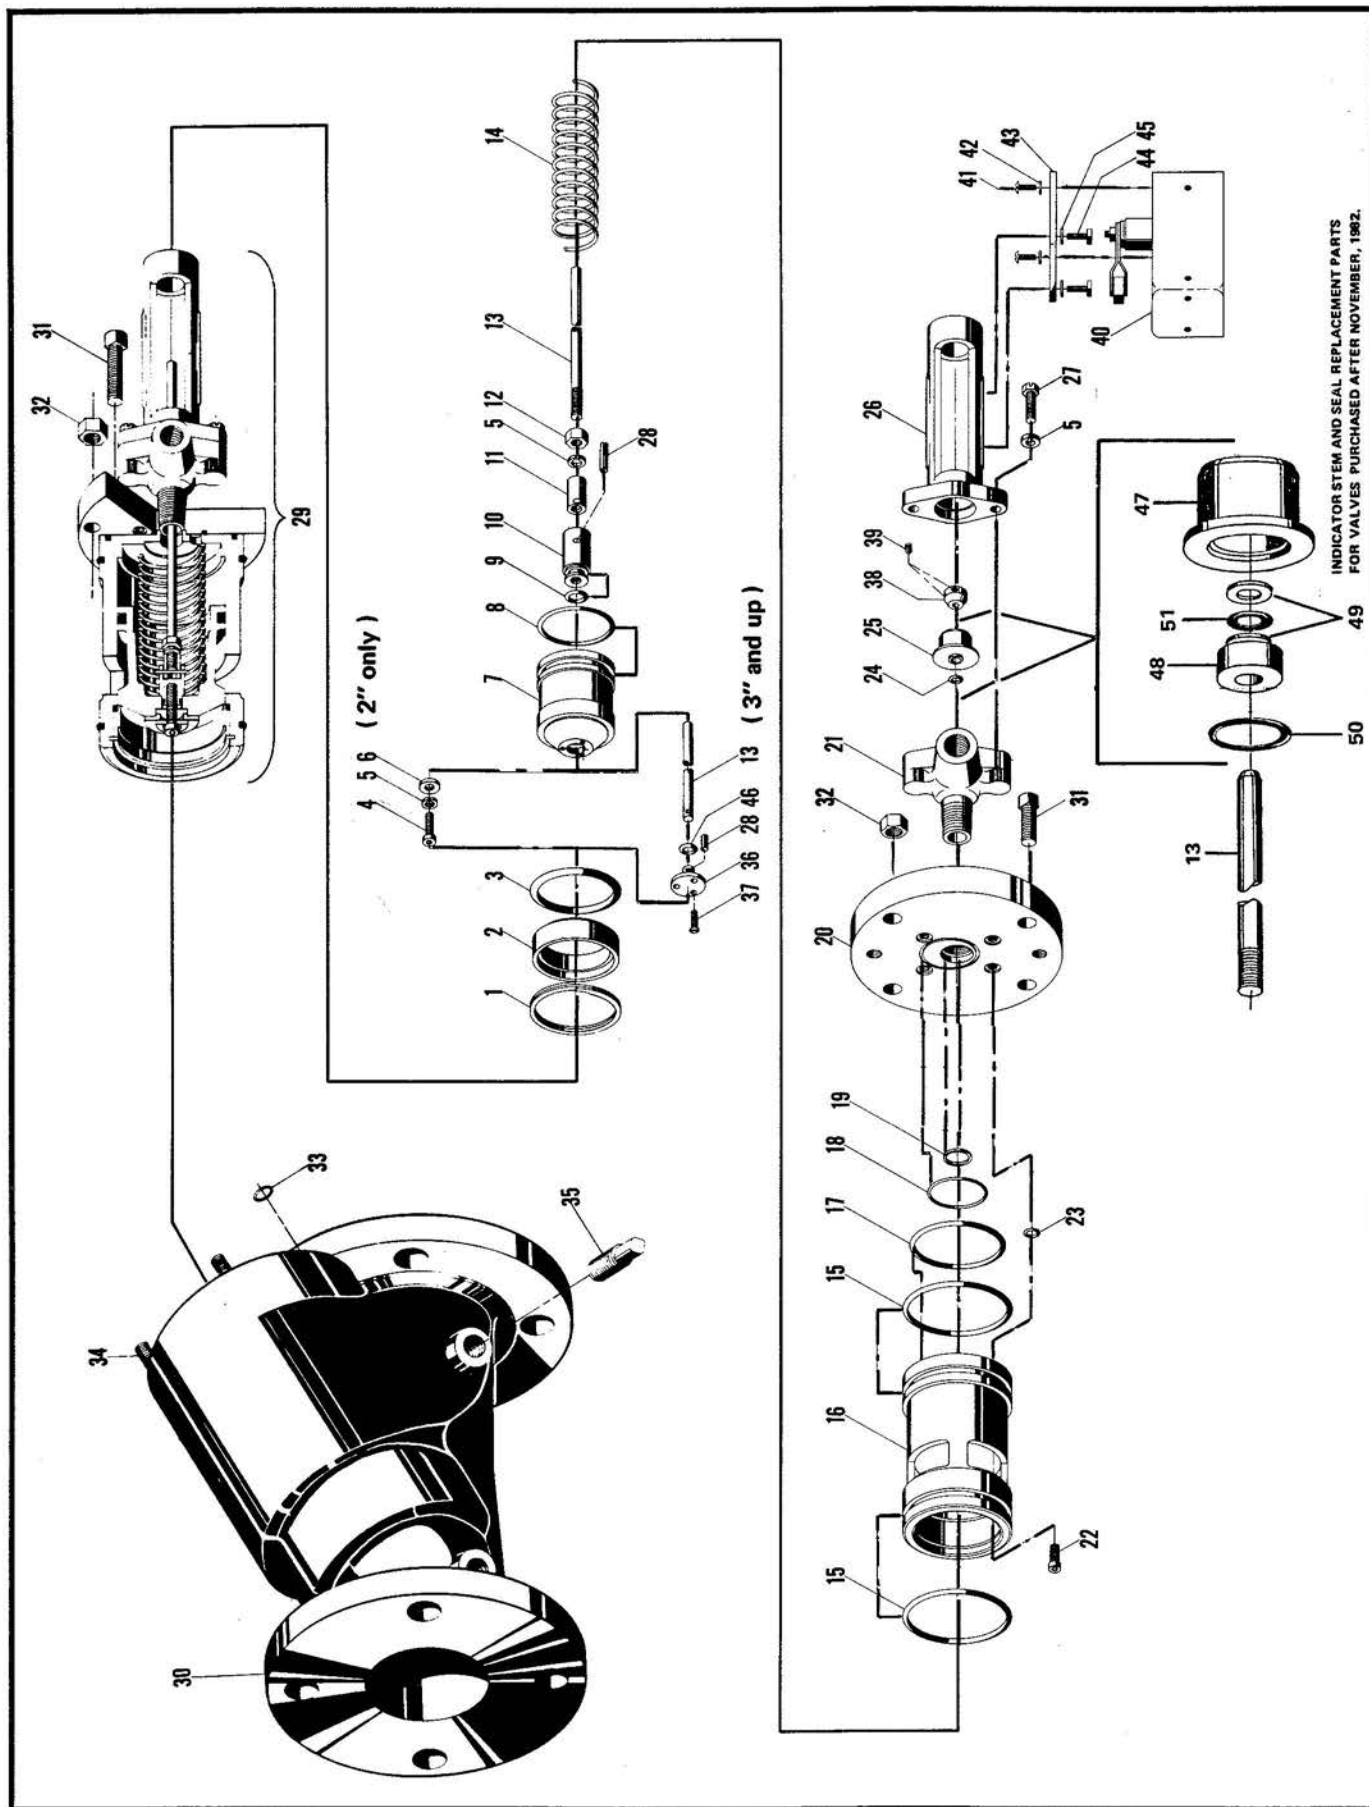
Parts Drawing - Series 700A Control Valves With Position Indicator
